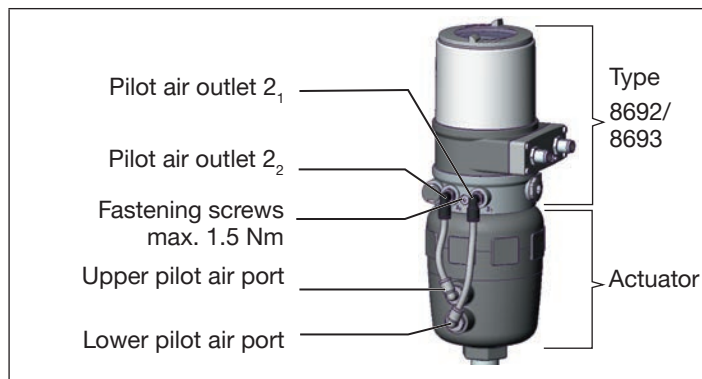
Installation of the pneumatic connections, series 26xx and 27xx
